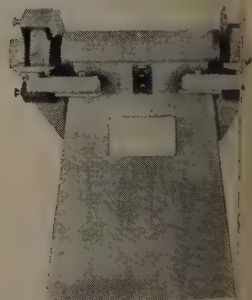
Present welded steel design. Quality of product and appearance improved to enhance sales appeal. Stability increased by lowering motor into pedestal base. Weight is cut 35% yet product more rigid and costs 12% less to produce. Courtesy, The Bridgeport Sargent & Wheel Co., Inc., Bridgeport, Conn.
